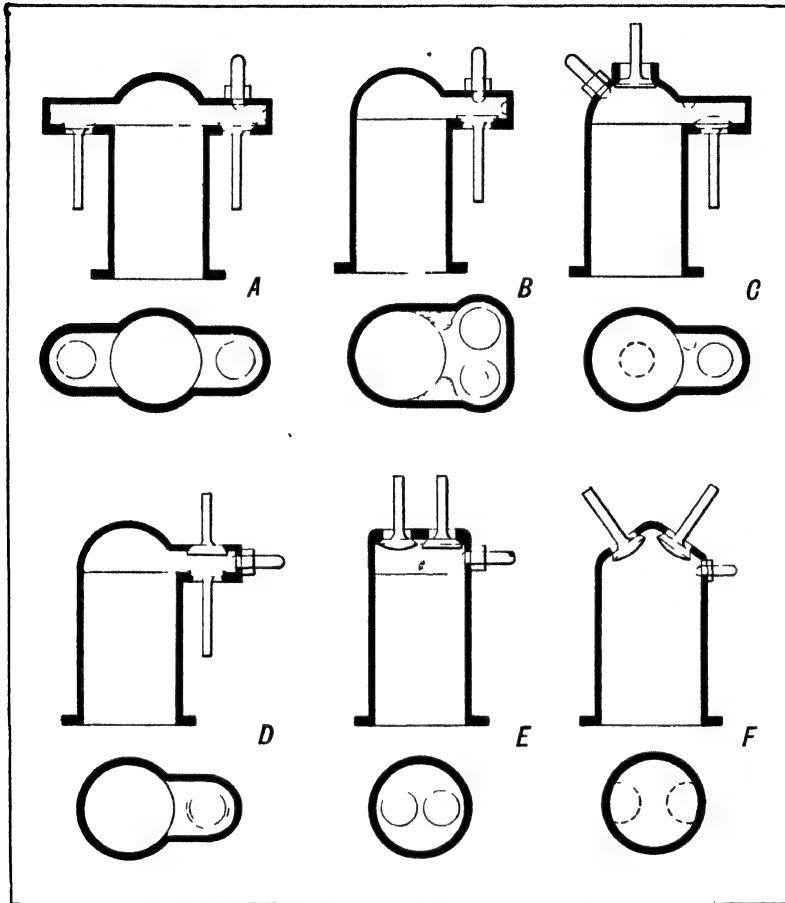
Diagrams Showing Forms of Cylinder and Combustion-Chambers Demanded by the Valve Placing. A—Tee Head Type, Valves on Opposite Sides. B—L Head Cylinder, Valves Side by Side. C—L Head Cylinder; One Valve in Head, the Other in Side Pocket. D—Inlet Valve Over Exhaust Member, Both in Side Pocket. E—Valve in Head Type with Vertical Valves. F—Inclined Valves Placed to Open Directly into Combustion-Chamber.
